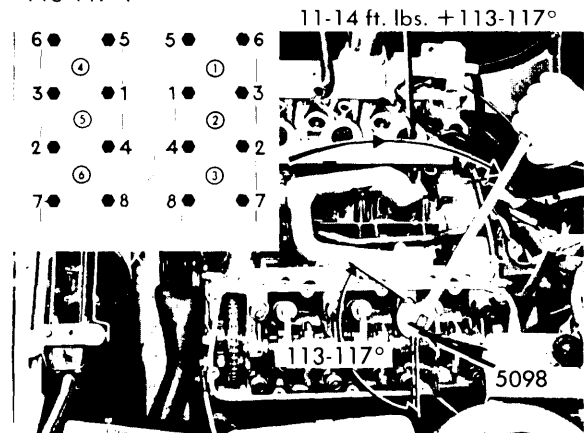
Final Torquing of Cylinder Head Bolts After Running and Cooling Engine
